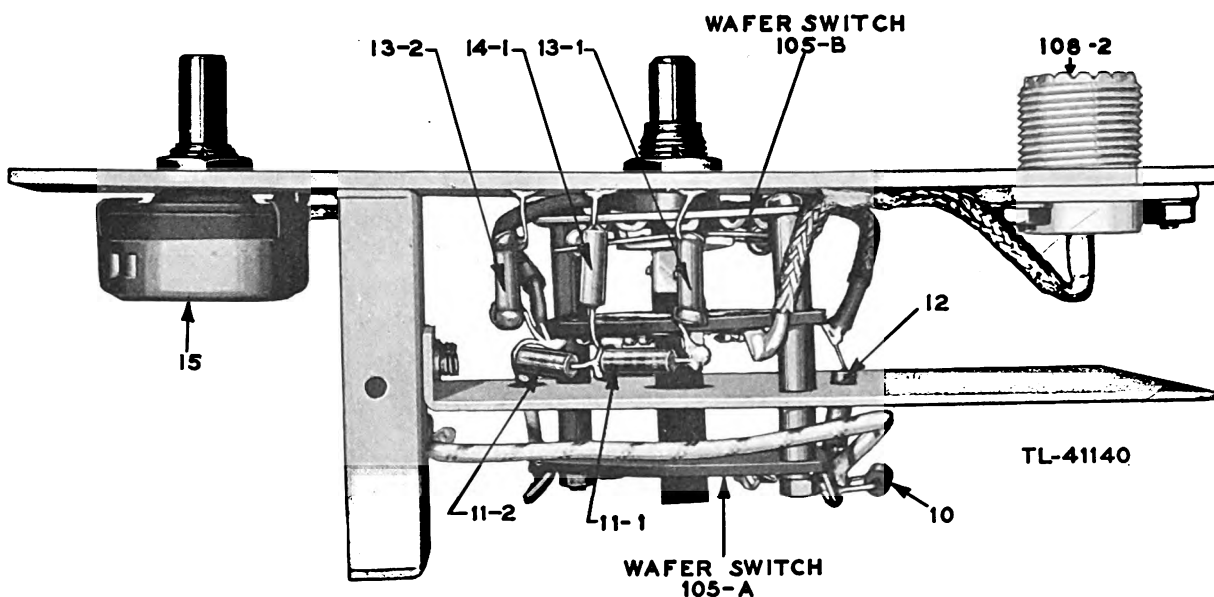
Signal Generator I-222-A, attenuator assembly removed from housing.
